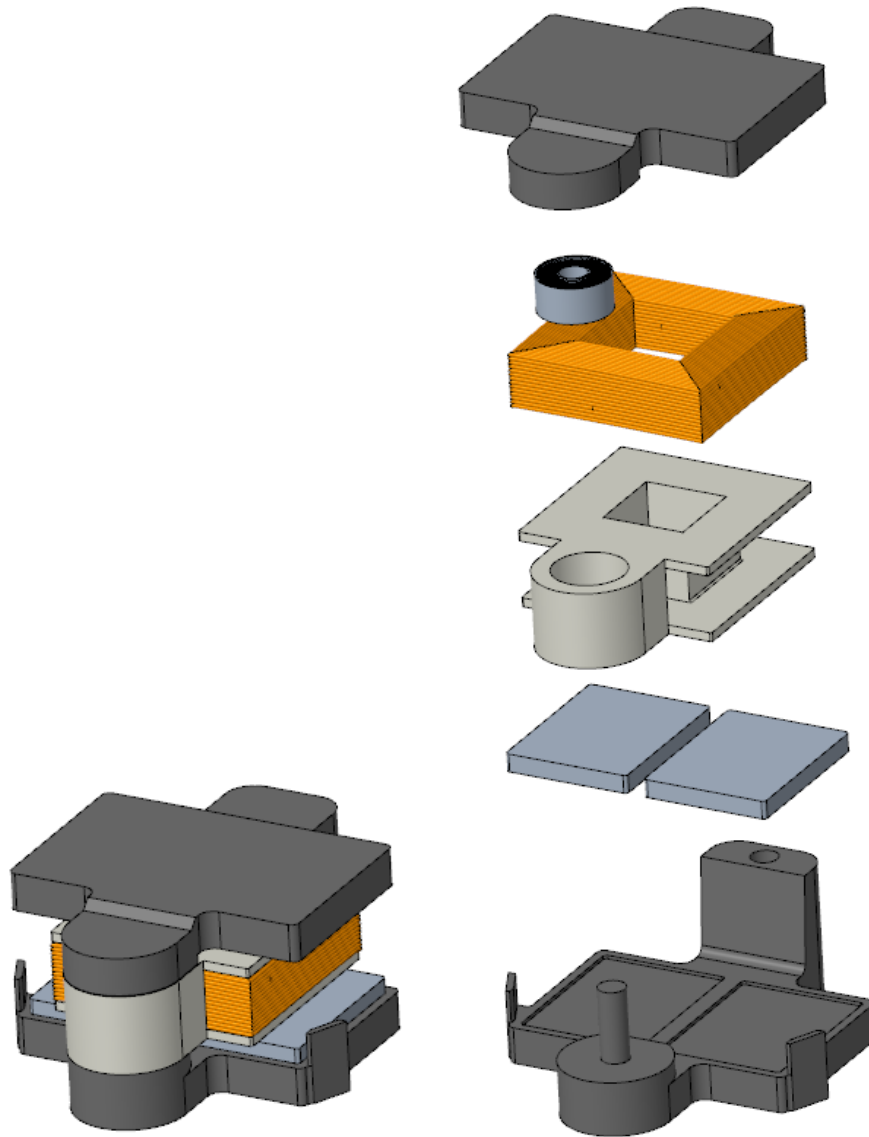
Left: The full actuator assembly. Right: the exploded view of the assembly.
